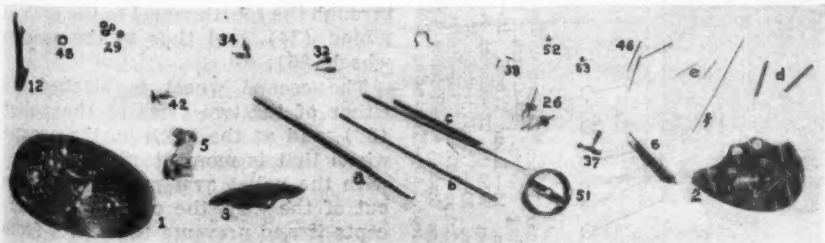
Parts of the mechanism of a wrist watch movement, photographed actual size, together with some of the drills and plug gages.
